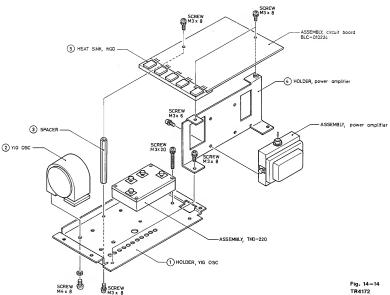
TR4172 MECHANICAL PARTS YIG OSCILLATOR BLOCK MEP-341 ASSEMBLY
